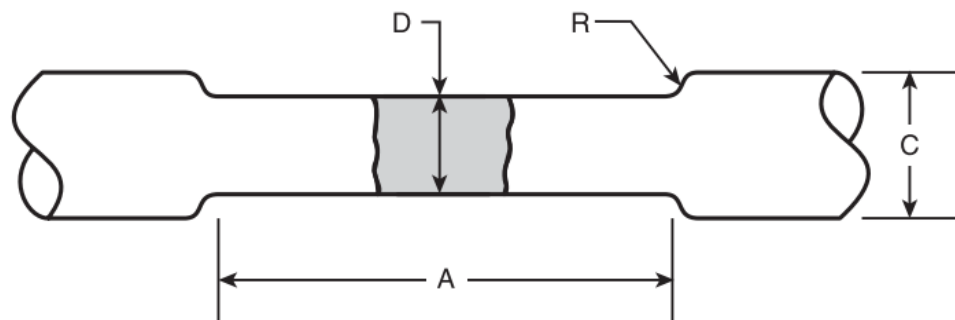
AWS D17.3/D17.3M:2016 tensile specimen geometry with a machined cylindrical cross section [51].
